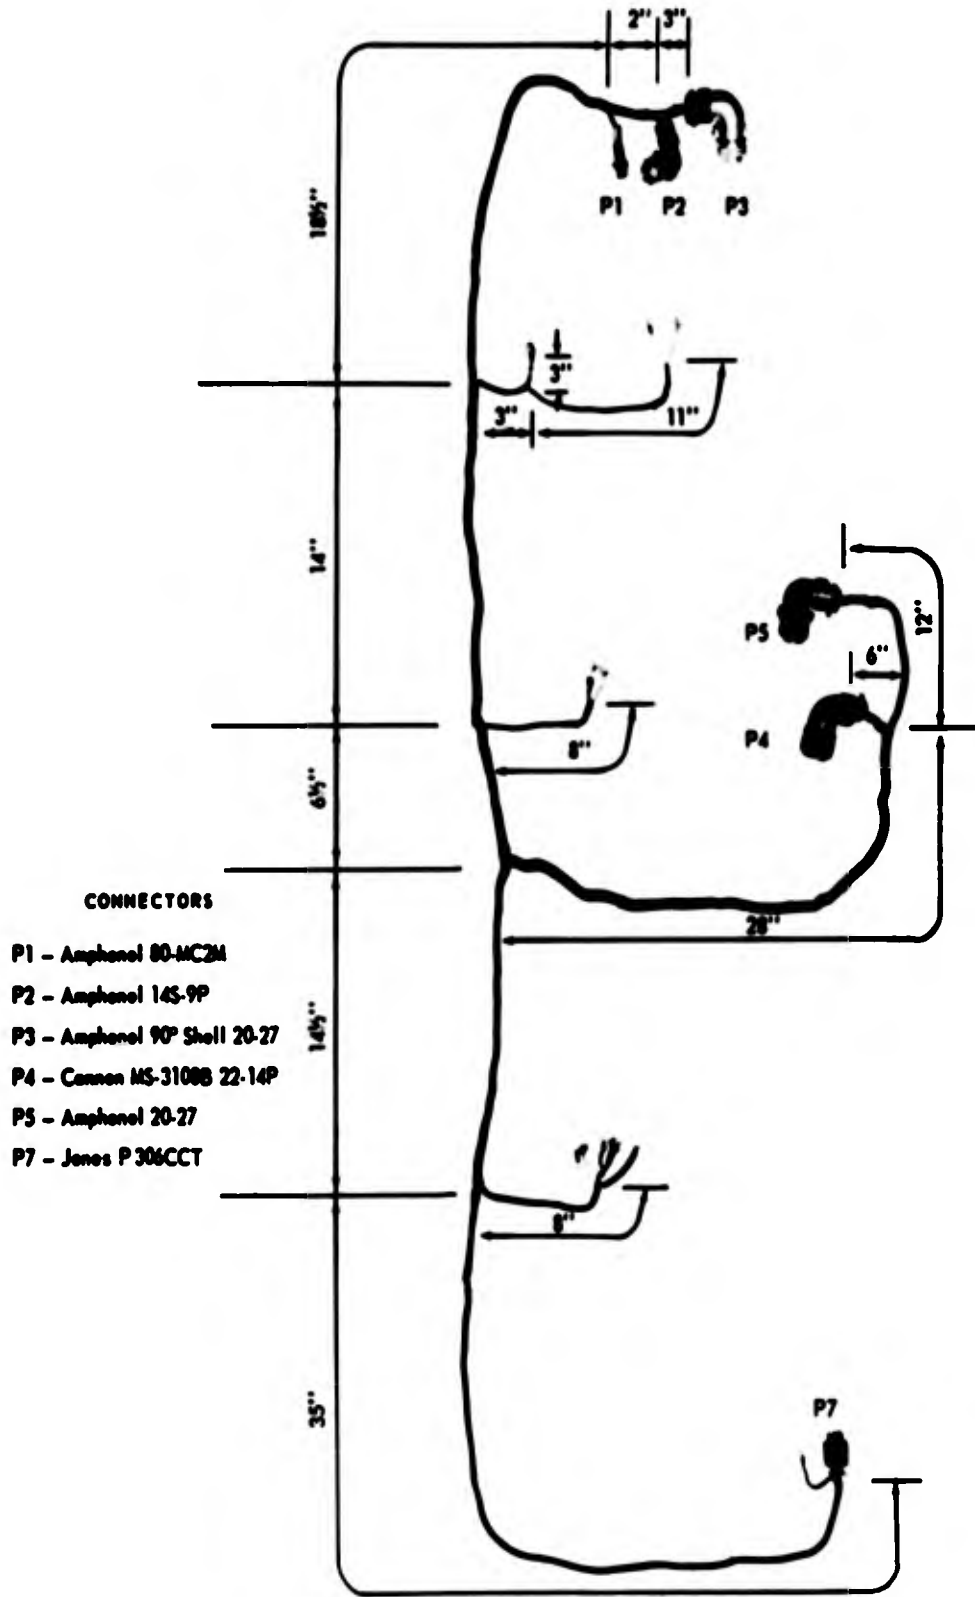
SAGE UHF single-channel rack harness assembly
